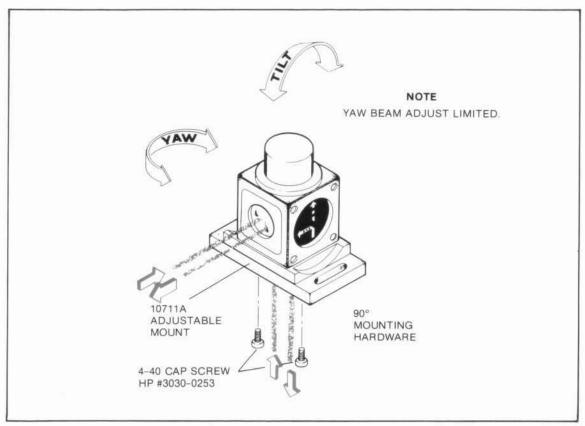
Vertical Plane Mounting Using the HP 10711A Adjustable Mount
